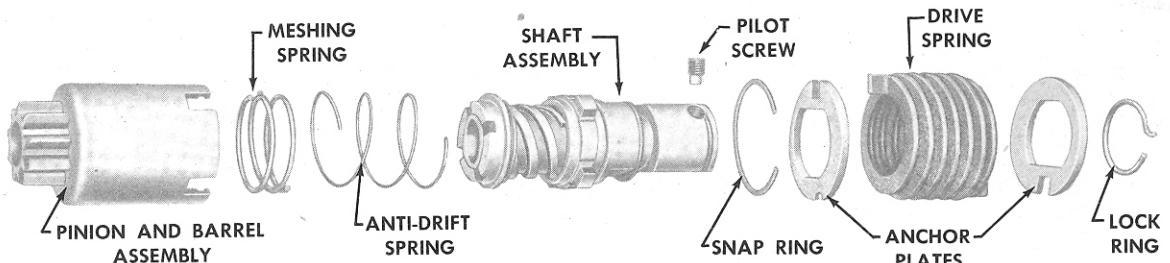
Exploded view of a barrel type Bendix drive such as is used on the cranking motor illustrated in Figure 5.
